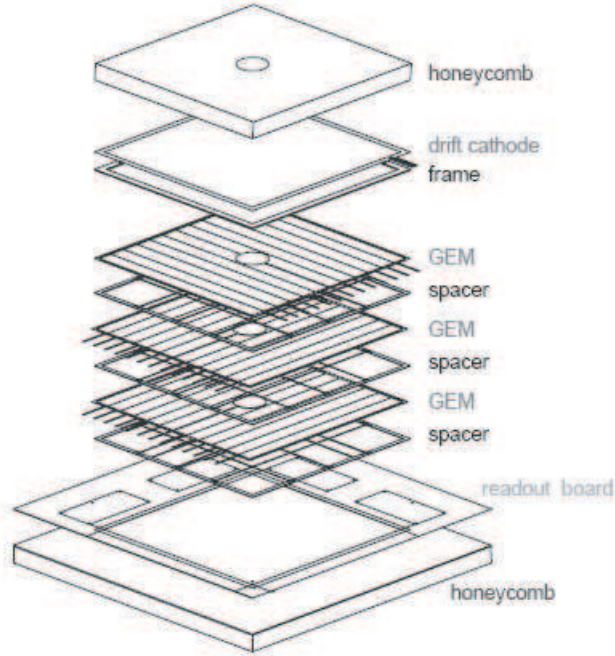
Exploded view of a COMPASS triple GEM detector[21].
